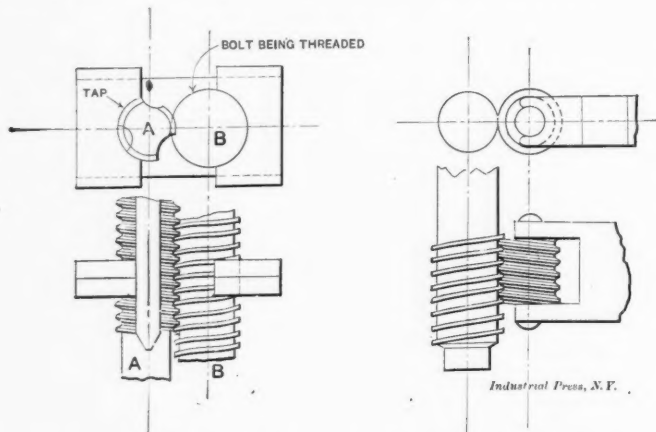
Early Method of Cutting Left-hand Screws with a Right-hand Tap.
